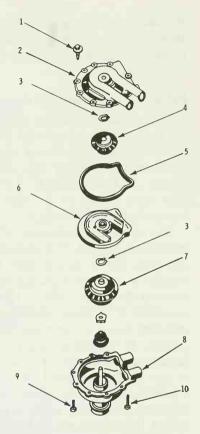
A typical washing-machine water pump. In the illustration, 1 represents a screw; 2, the upper pump housing; 3, a retainer ring (2); 4, the upper impeller; 5, the gasket; 6, the pump partition; 7, the lower impeller; 8, the lower pump housing; 9, a screw; and 10, a screw.
